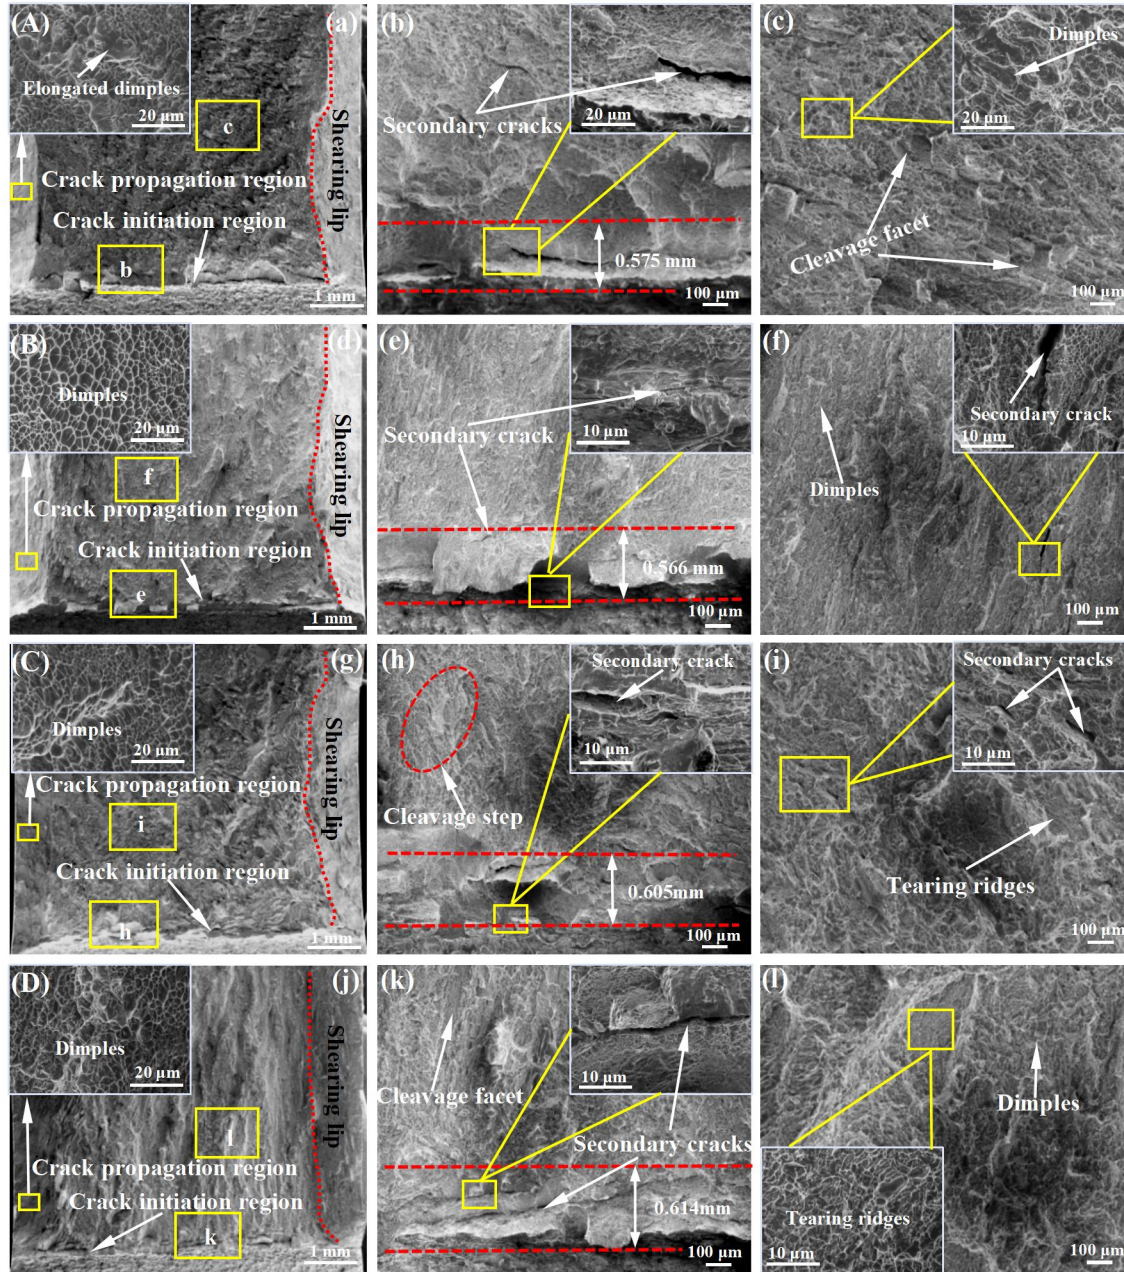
Fracture morphology after impact tests of specimens A-D; (a), (d), (g) and (j) macroscopic fracture surface morphology; (b), (e), (h) and (k) secondary cracks in macroscopic crack initiation region; (d) macroscopic crack propagation region; (c), (f), (i) and (l) crack propagation region showing dimples, tearing ridges, or cleavage facets.
